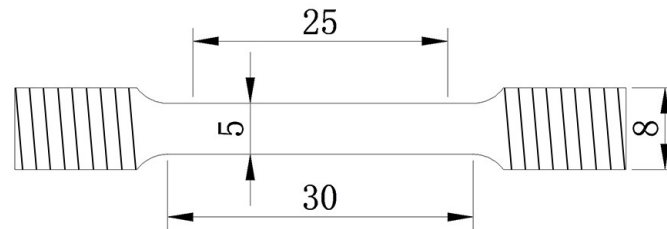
Schematic diagram of a tensile specimen. All dimensions are shown in millimeters (mm).
